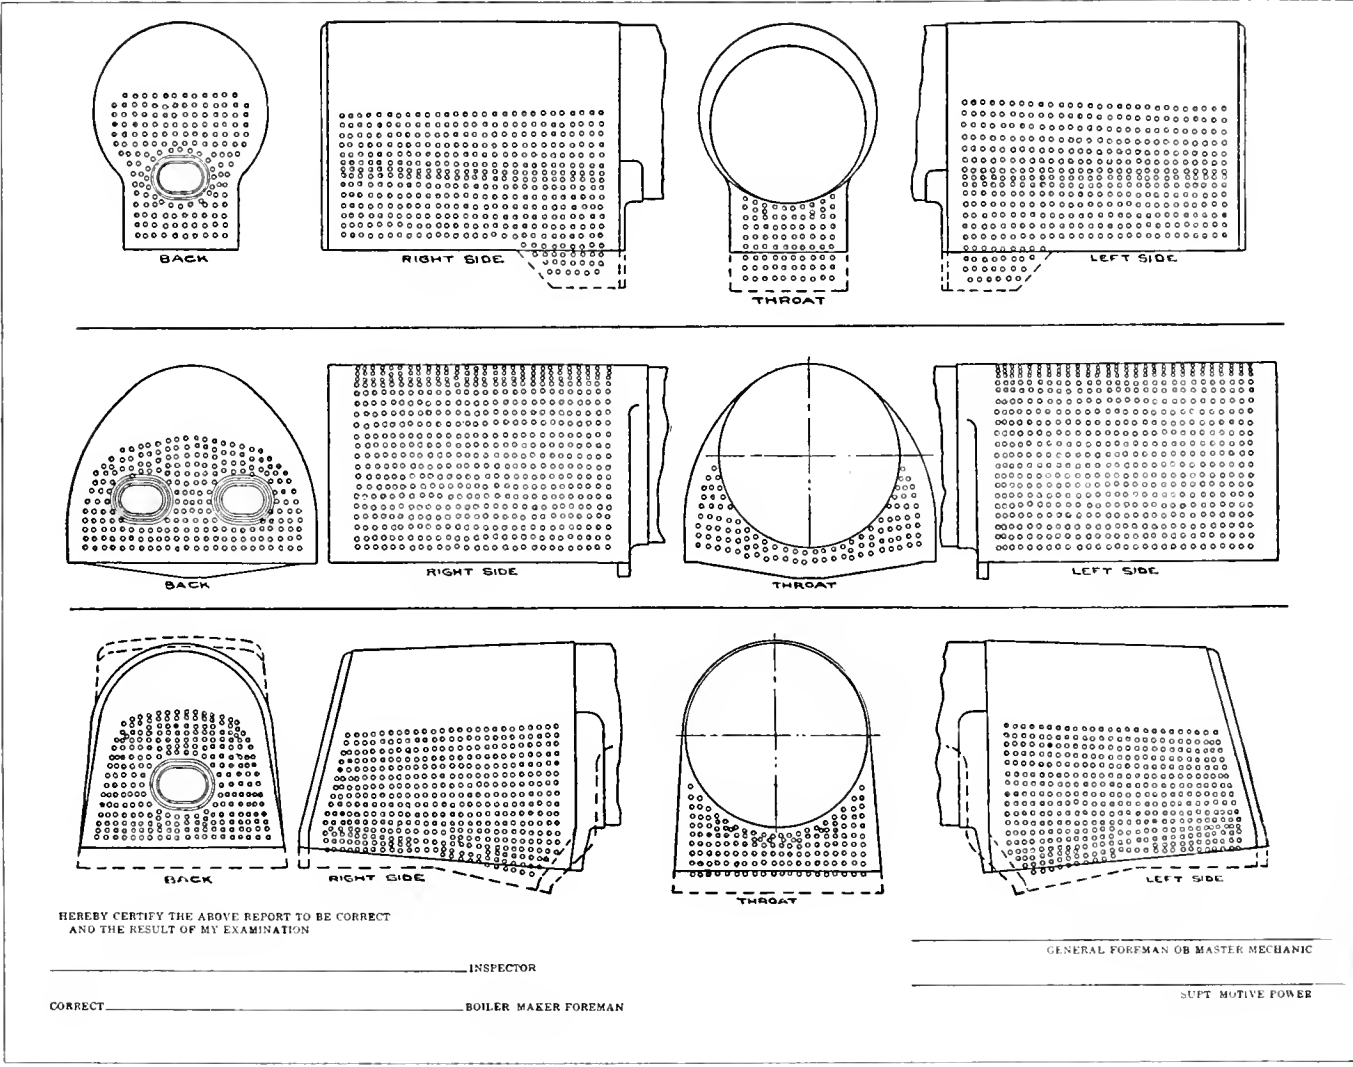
Form for Report of Staybolt Test and Firebox Inspection.
